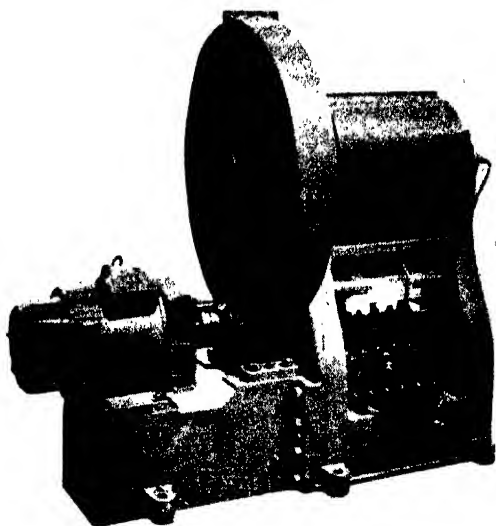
THREE-THROW HYDRAULIC PUMP
